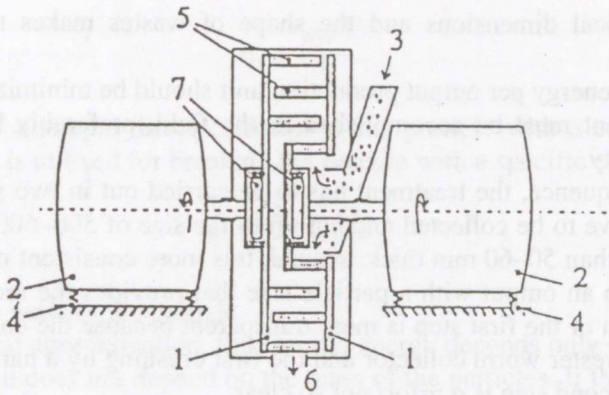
Disintegrator: 1 – rotors, 2 – power drives, 3 – material supply, 4 – elastic beds, 5 – grinding elements, 6 – output, 7 – adaptive controller.
